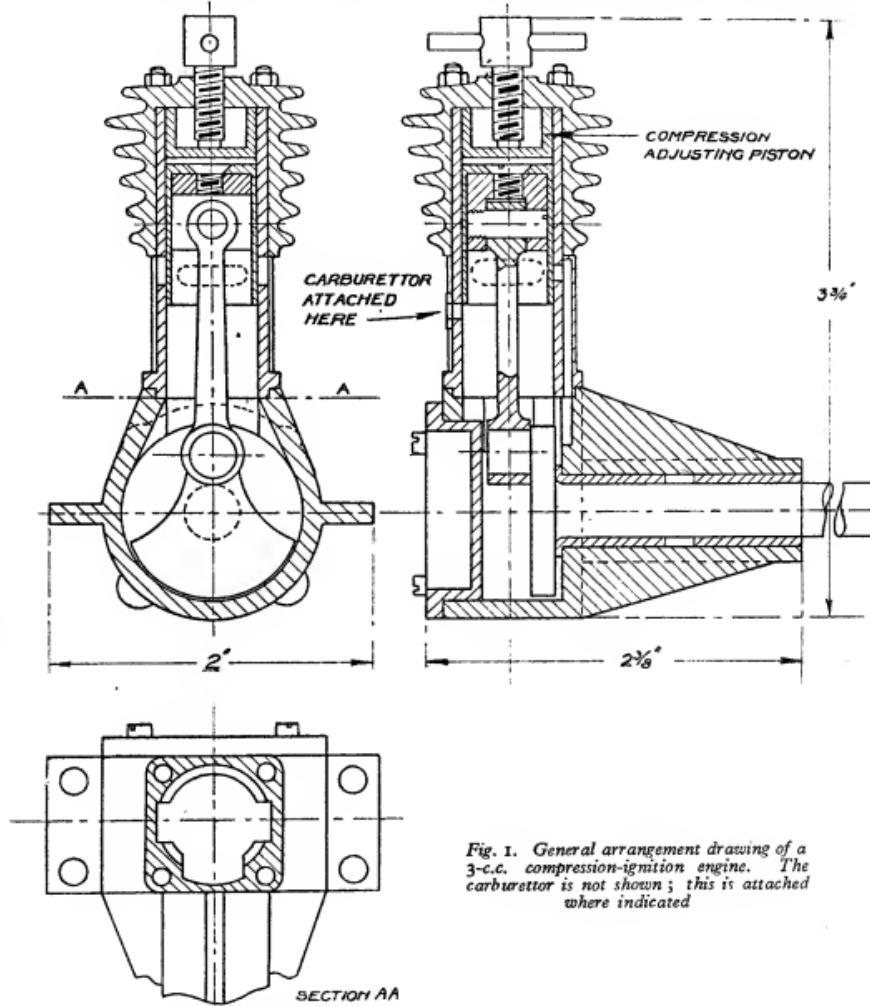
General arrangement drawing of a 3-c.c. compression-ignition engine. The carburettor is not shown; this is attached where indicated
